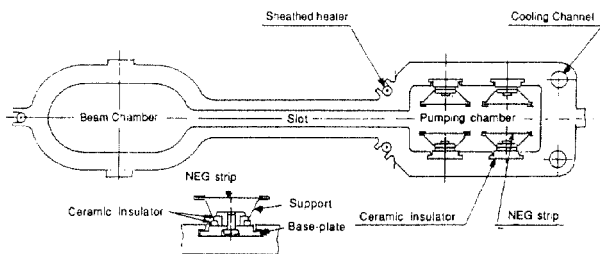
Cross-sectional view of the vacuum chamber for the straight section.
